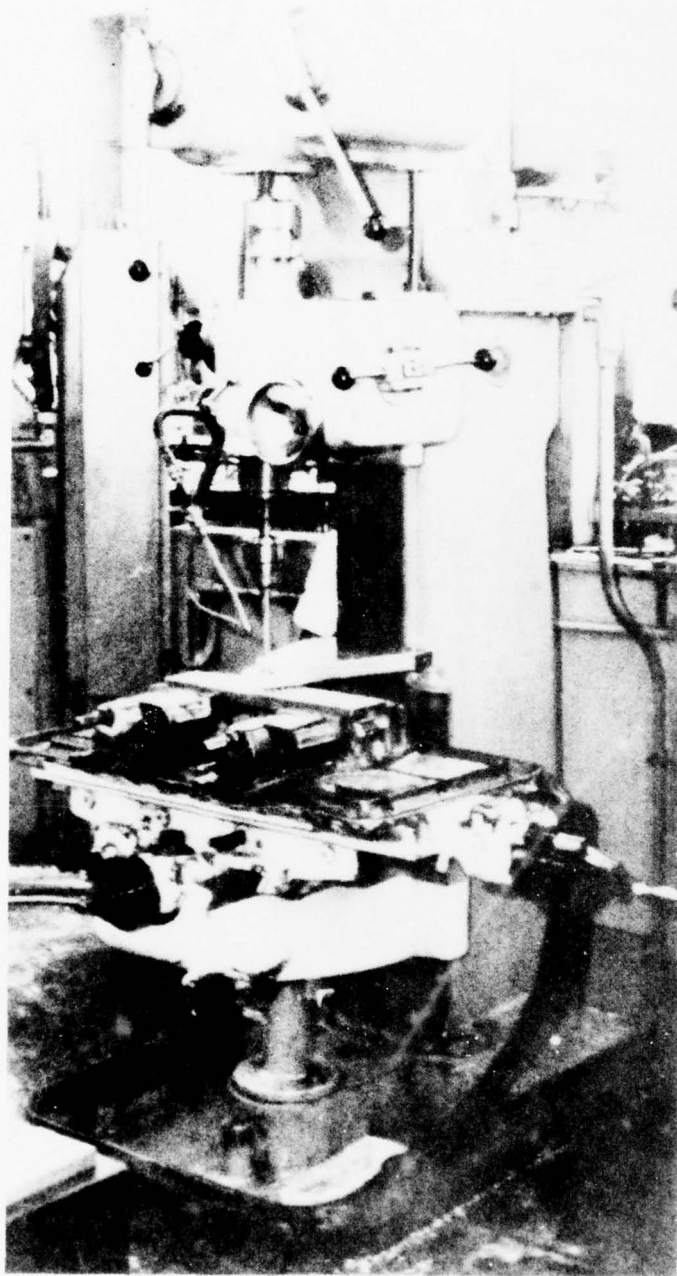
Cleereman 25D, 5-hp, drilling machine (set up for reaming tests).
